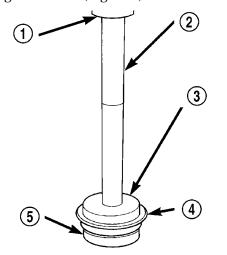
Install Transfer Shaft Bearing Cup Into Retainer
